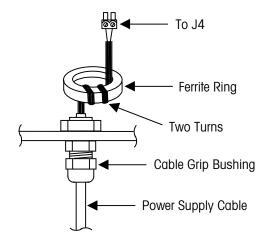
Ferrite Ring Installed with Power Supply Cable
